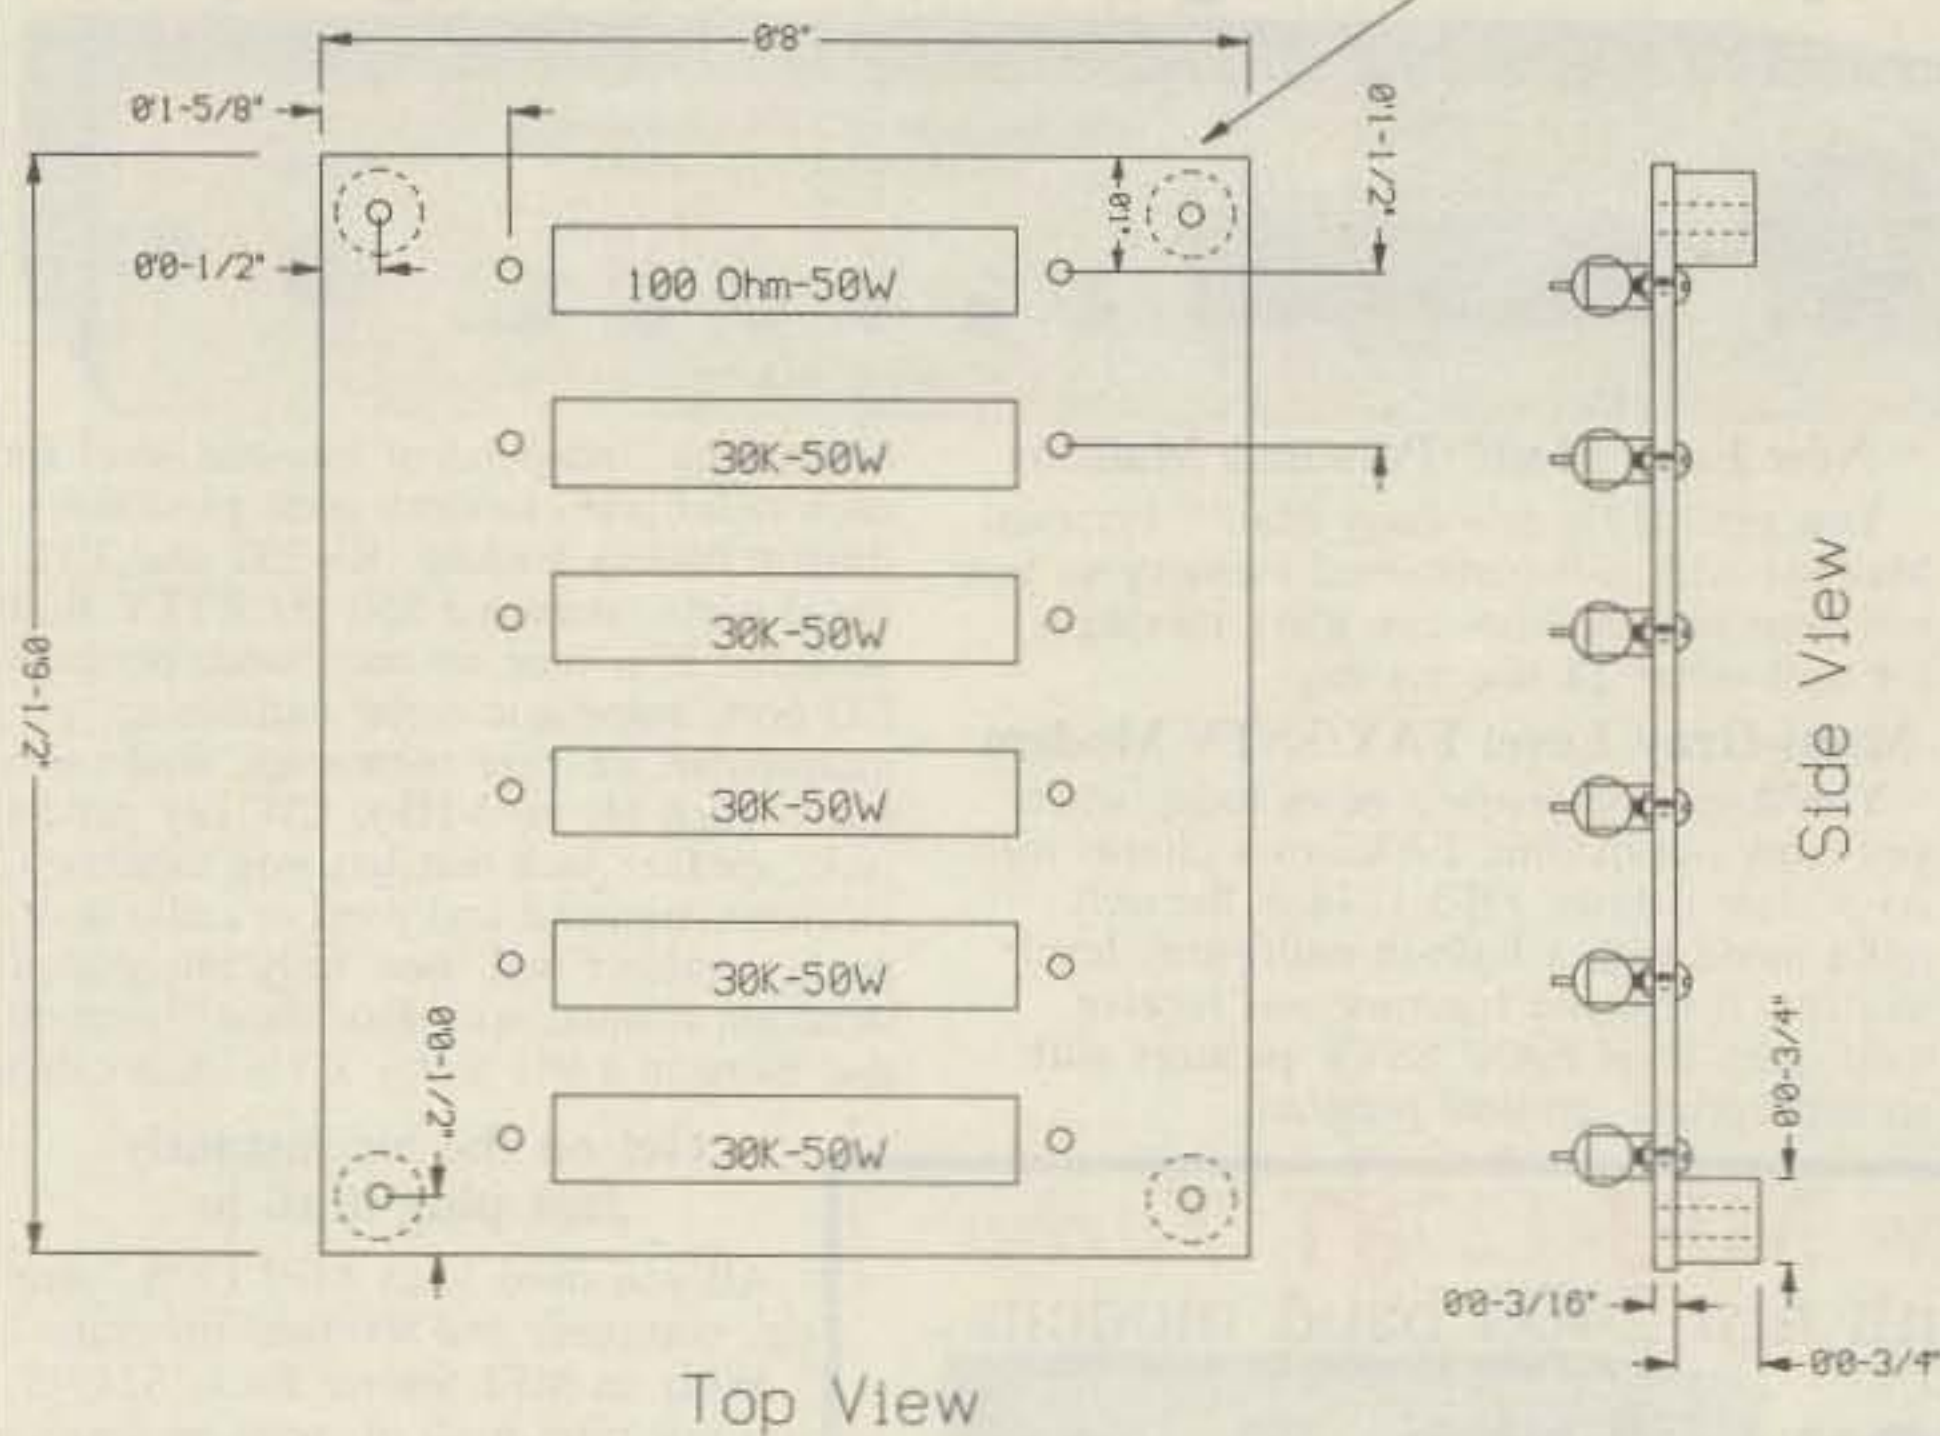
Mechanical diagram and parts placement for the bleeder resistor assembly.
